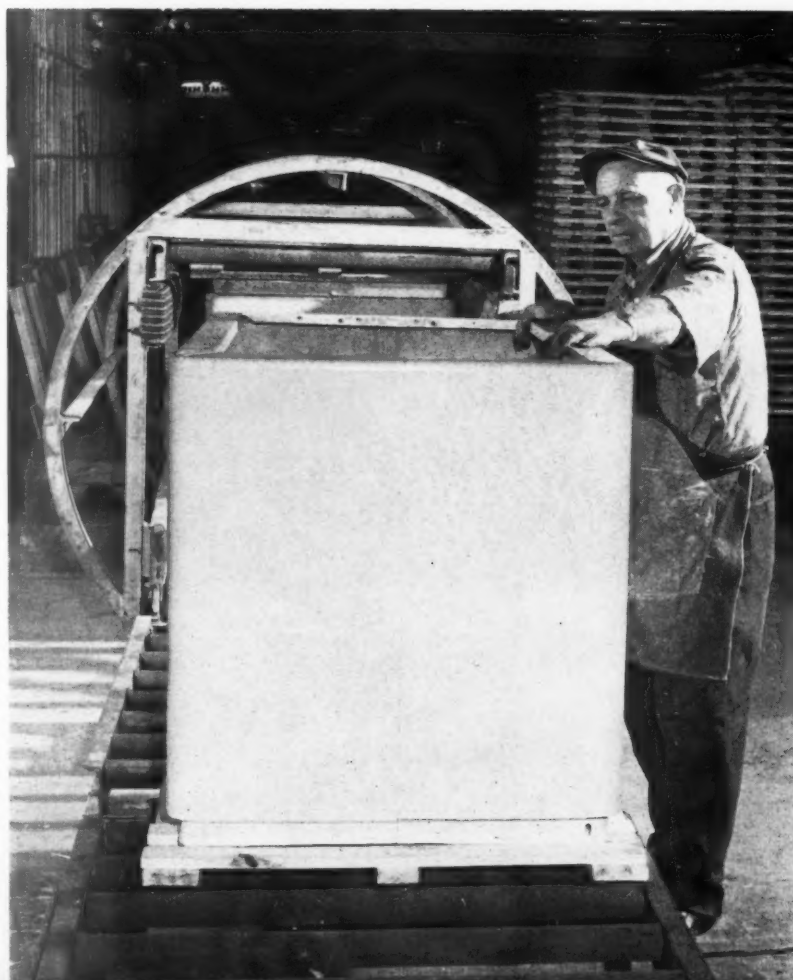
Cabinet shells are turned right-side up in this rotating fixture after addition of crate bottom.
